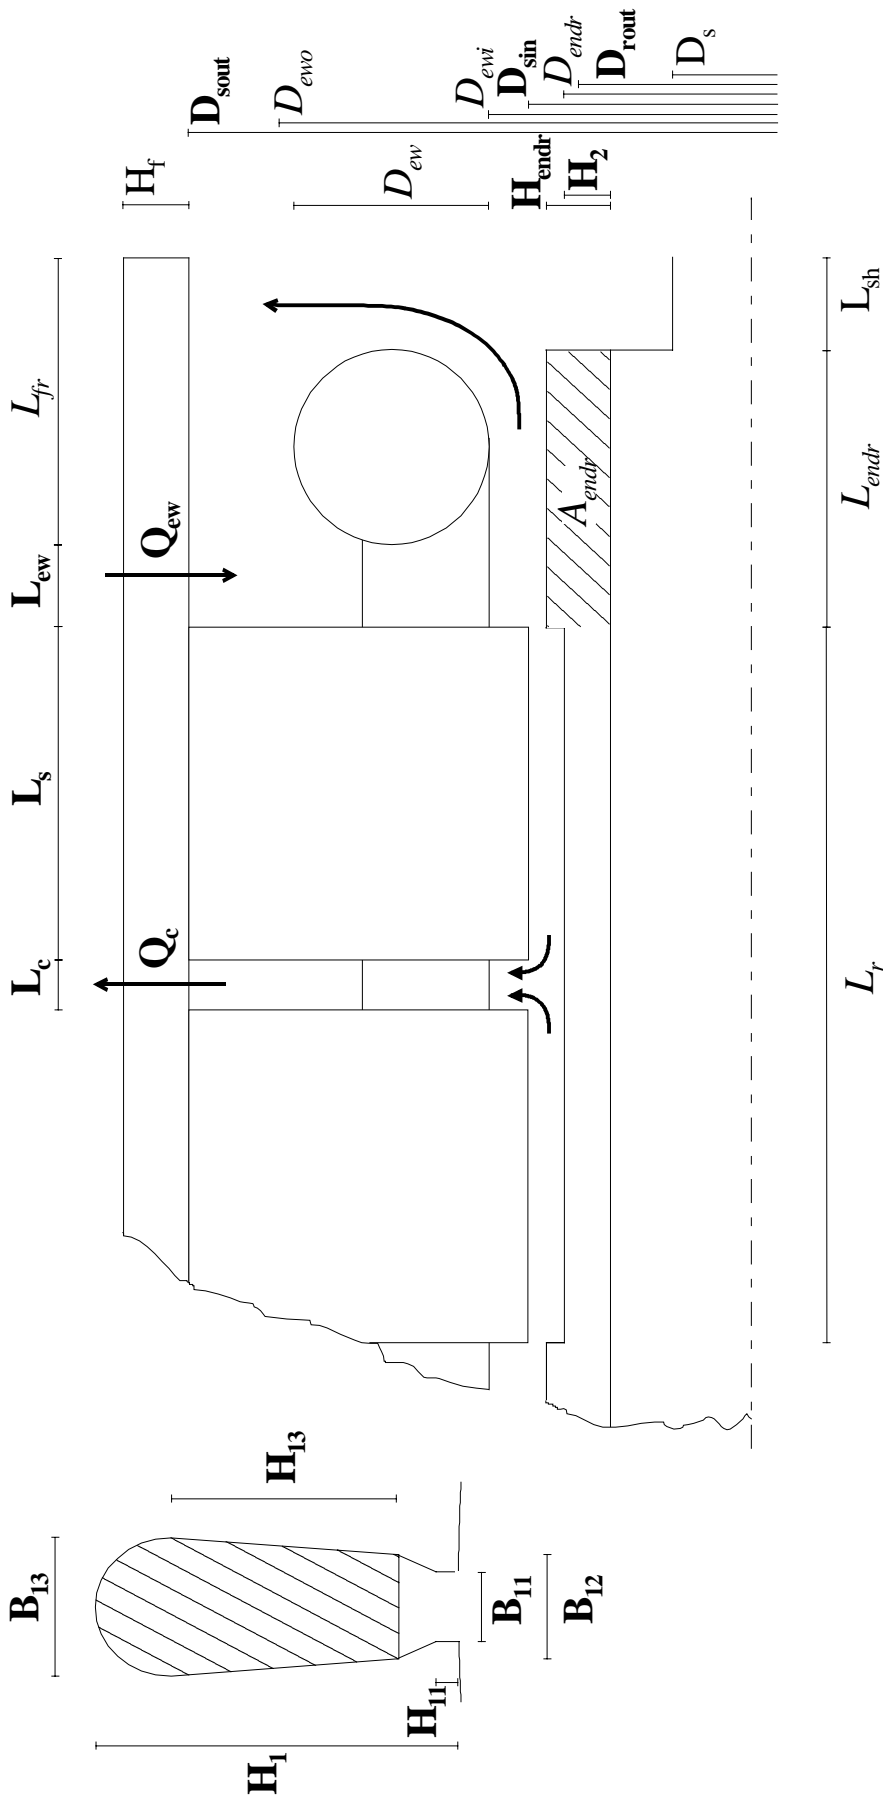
The parametrized design of a high-speed induction machine. The cooling air flows are shown with the bold face arrows
